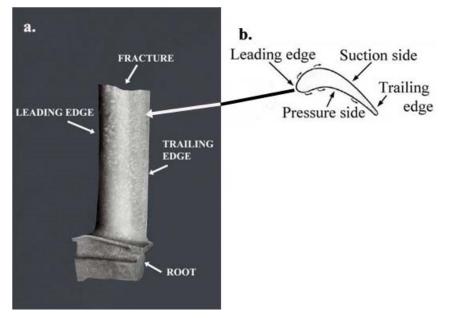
a. Fractured turbine blade IN 100 of the second stage of "Viper" jet engine; b. cross-section of aero-profile
